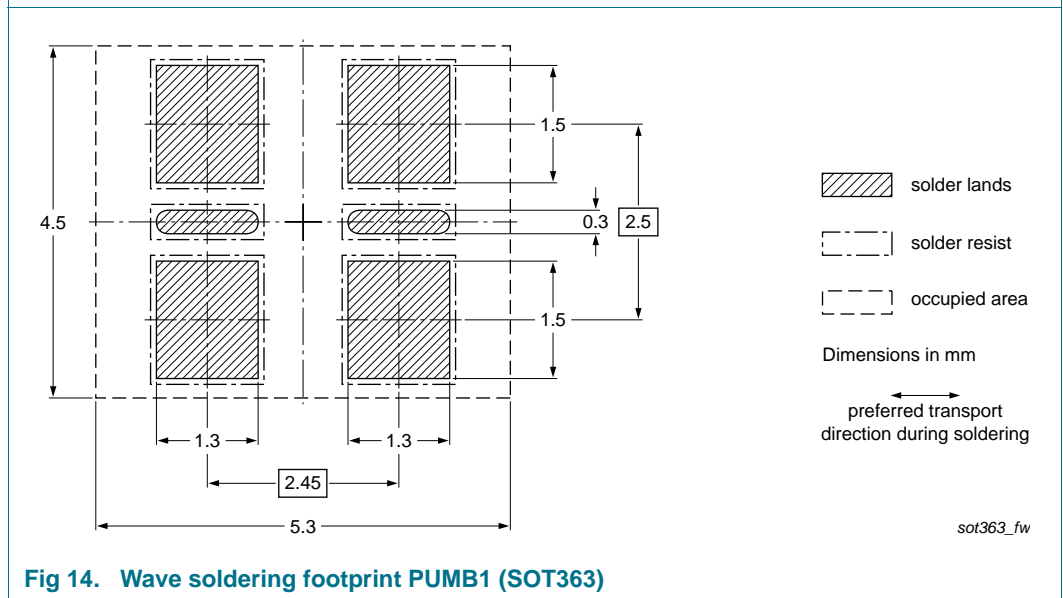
Wave soldering footprint PUMB1 (SOT363)
